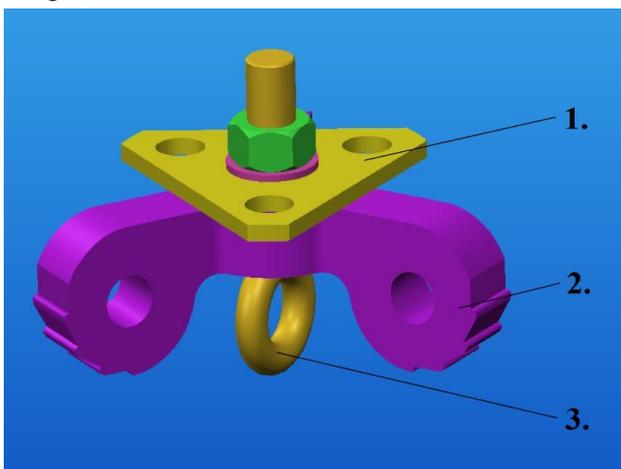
Connection subassembly (1-anchor flange, 2-fixing body, 3-retaining ring).
